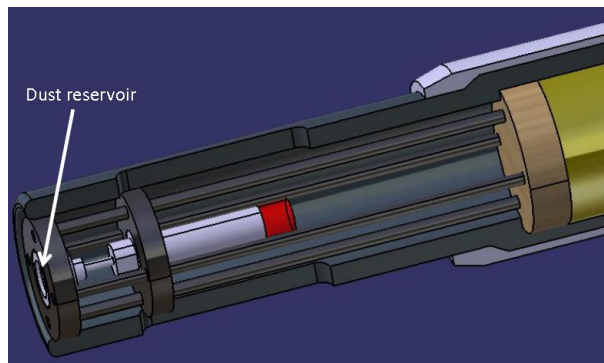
Picture of the dust injector as it will be installed on the reciprocating probe of Tore Supra
